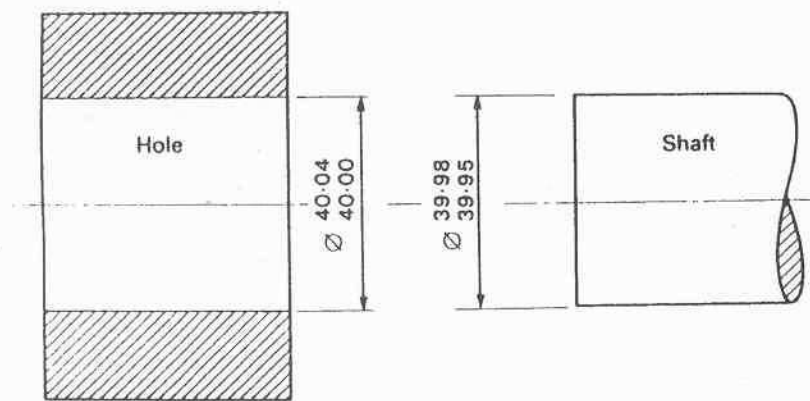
Average clearance fit – toleranced dimensions
